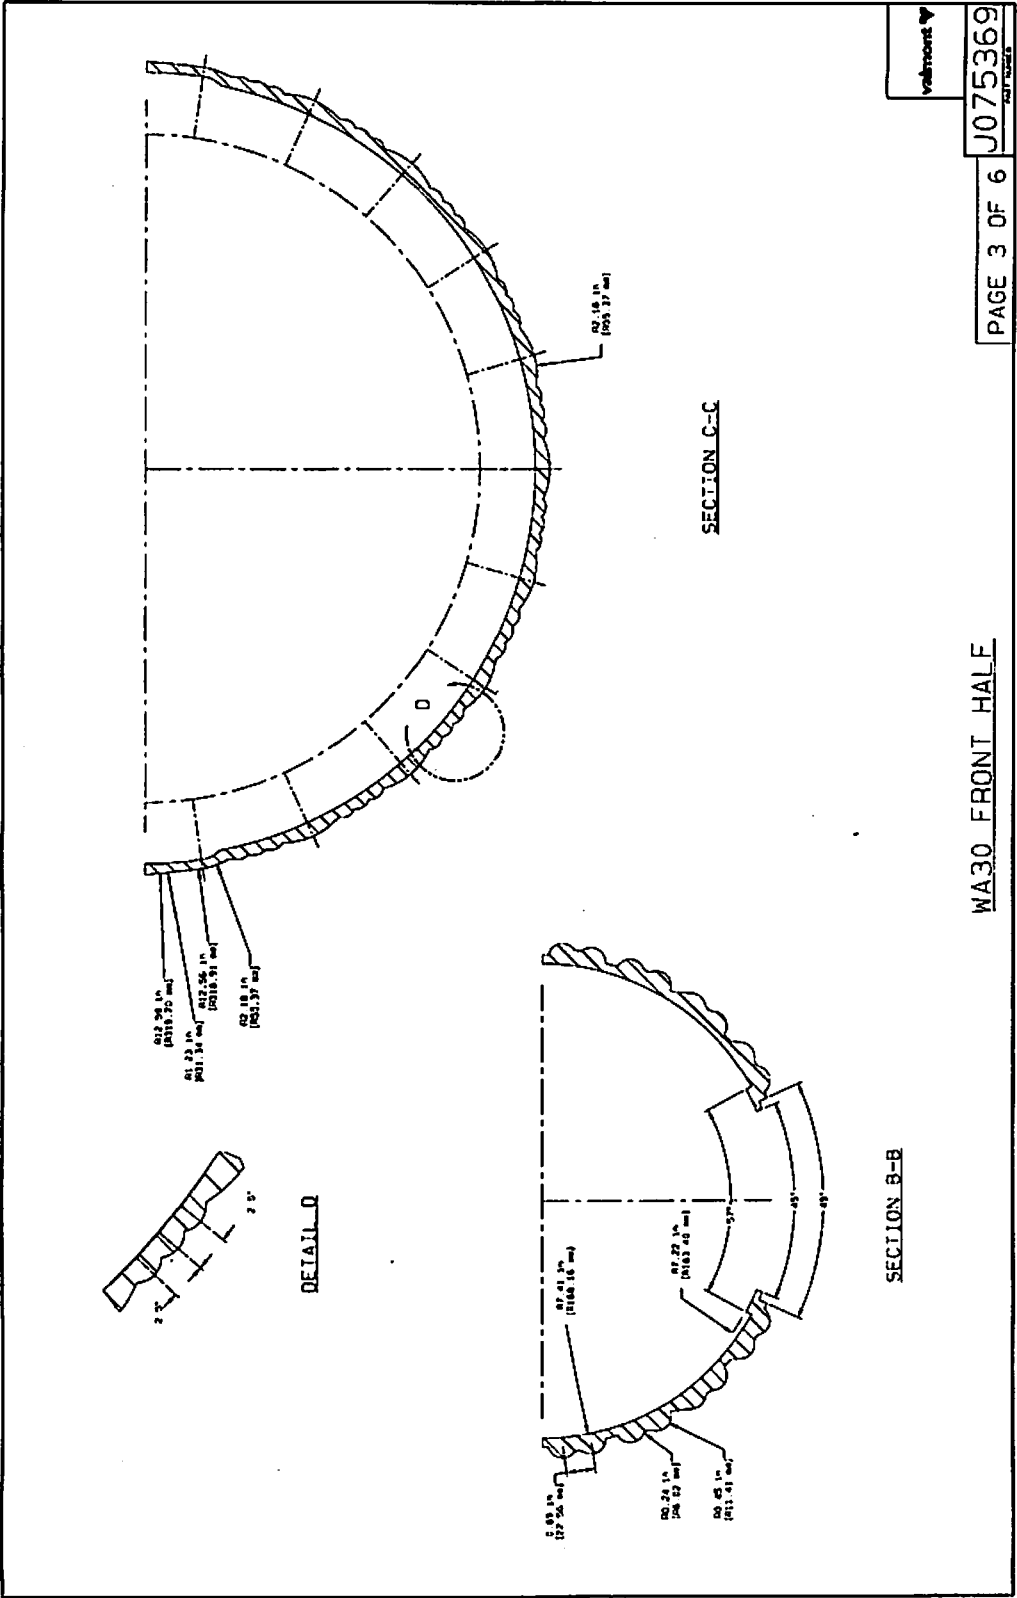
Washington-30 Clamshell Base Details, Test No. LST-353-05
